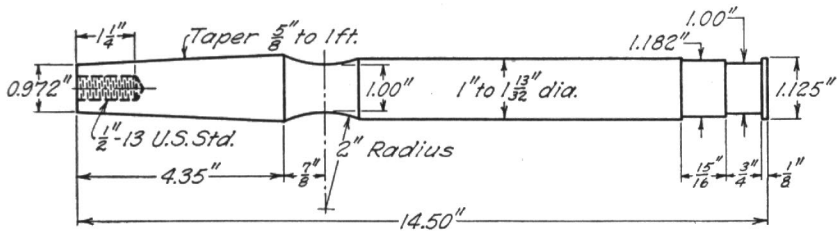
SPECIMEN FOR ROTATING-CANTILEVER FATIGUE TESTING MACHINE
